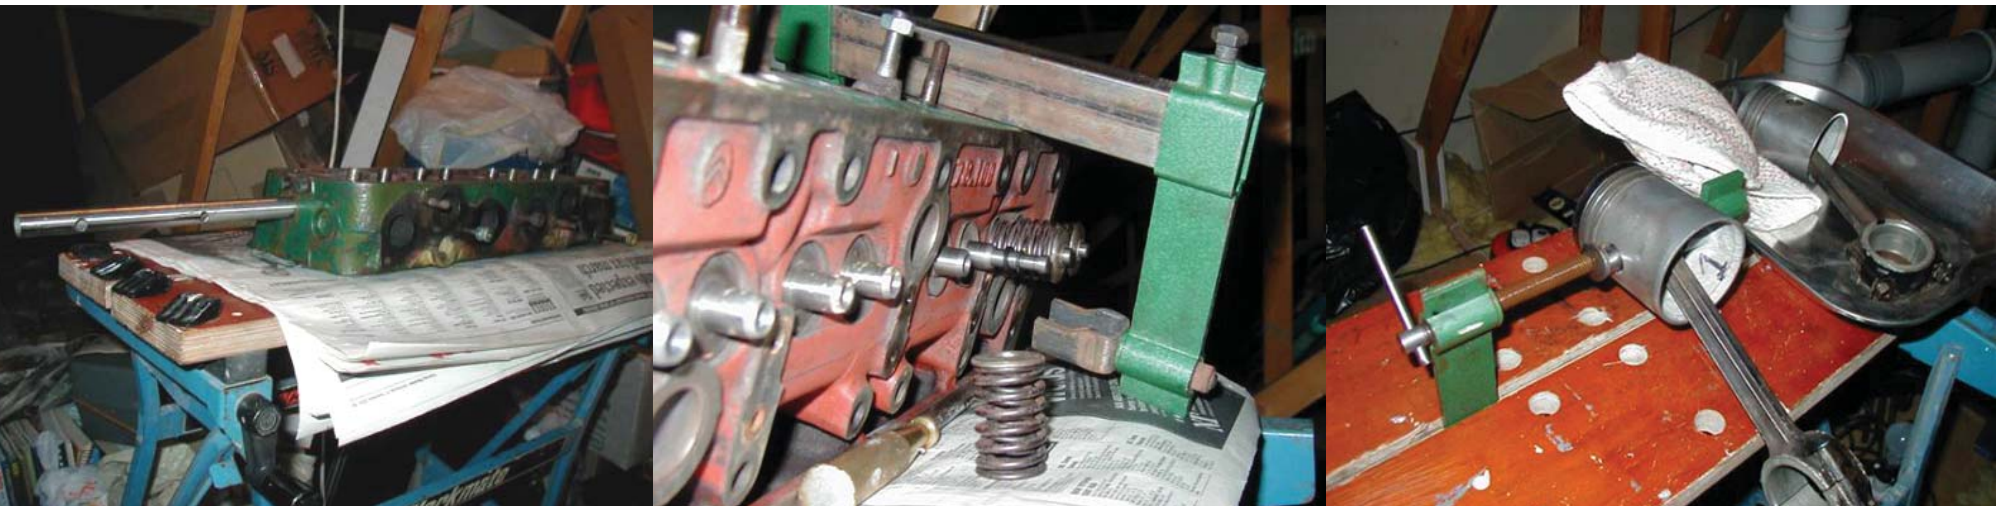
[left]: The tube was fed through from the rear ensuring that the holes at all times pointed towards the valve housings above the combustion chambers which was confirmed by the marks I had made on the tube [Photo 2]. Just before the tube was driven to its final position I coated each end with 'sleeve and bush retainer' fluid. I had purchased a new core plug from the machine shop but this proved too loose a fit in the head recess – another call to the TOC spares department! [I do
